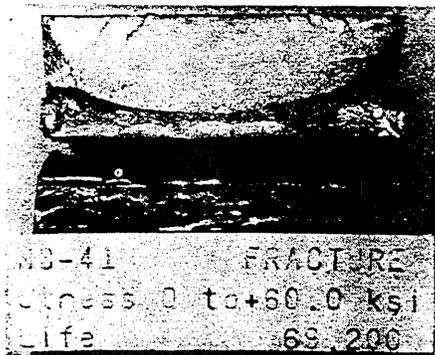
Photograph of fracture surface of butt-welded specimen in which fatigue cracking initiated at the toe of the weld
